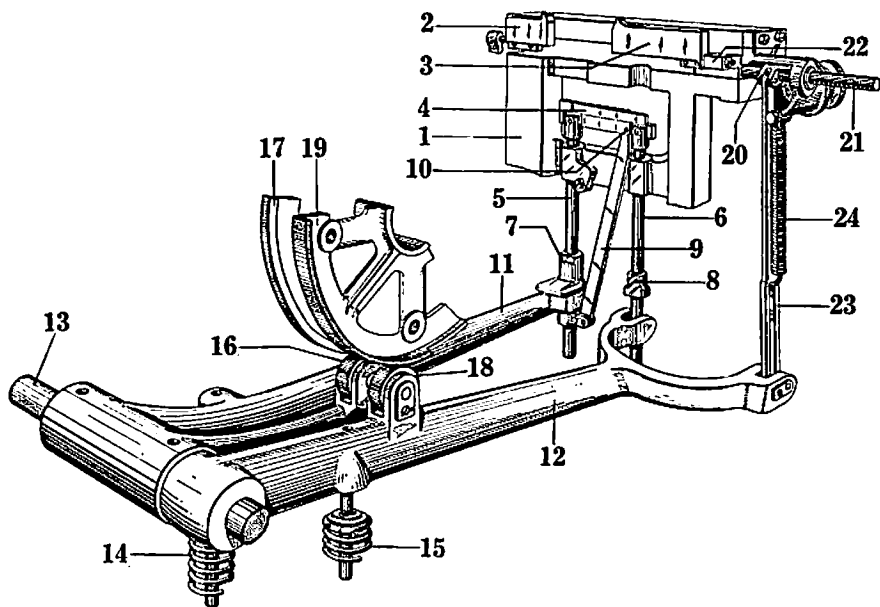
Perspective View of the Justification and Vise Closing Mechanism in Assembly
